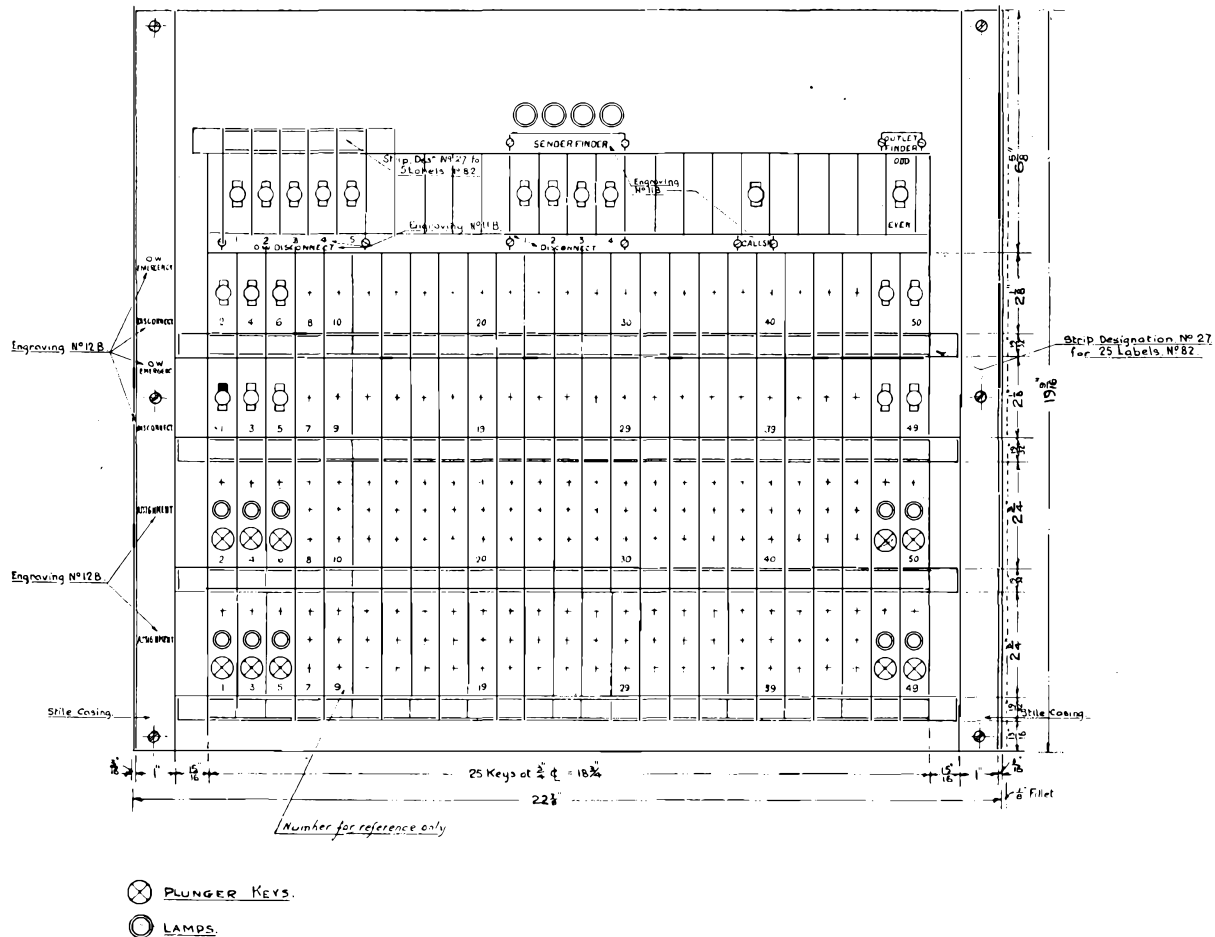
PANEL EQUIPMENT, CORDLESS B POSITION.
